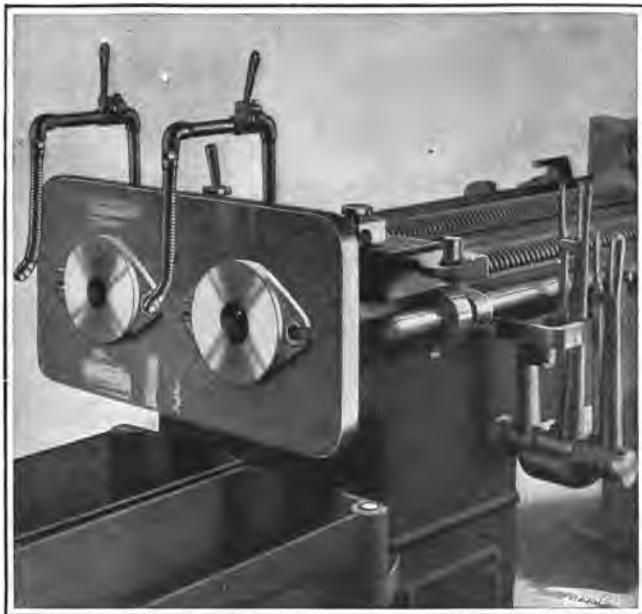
Close-up View of the Operating Screws and Control Levers on Duplex Broaching Machine
